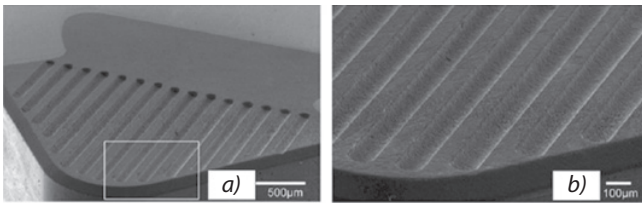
Example of micro-structure fabricated on the rake face of CBN cutting insert using μ EDM process: a) view of texture on the corner, b) magnified grooves [5]
